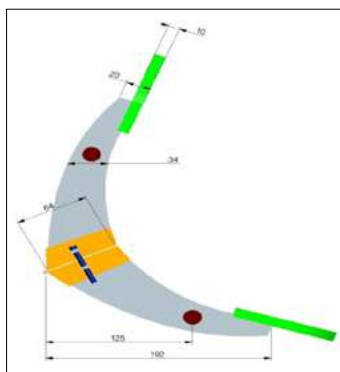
& 2 CAD of improved adjustable saddle for Yak (dimensions in mm)
